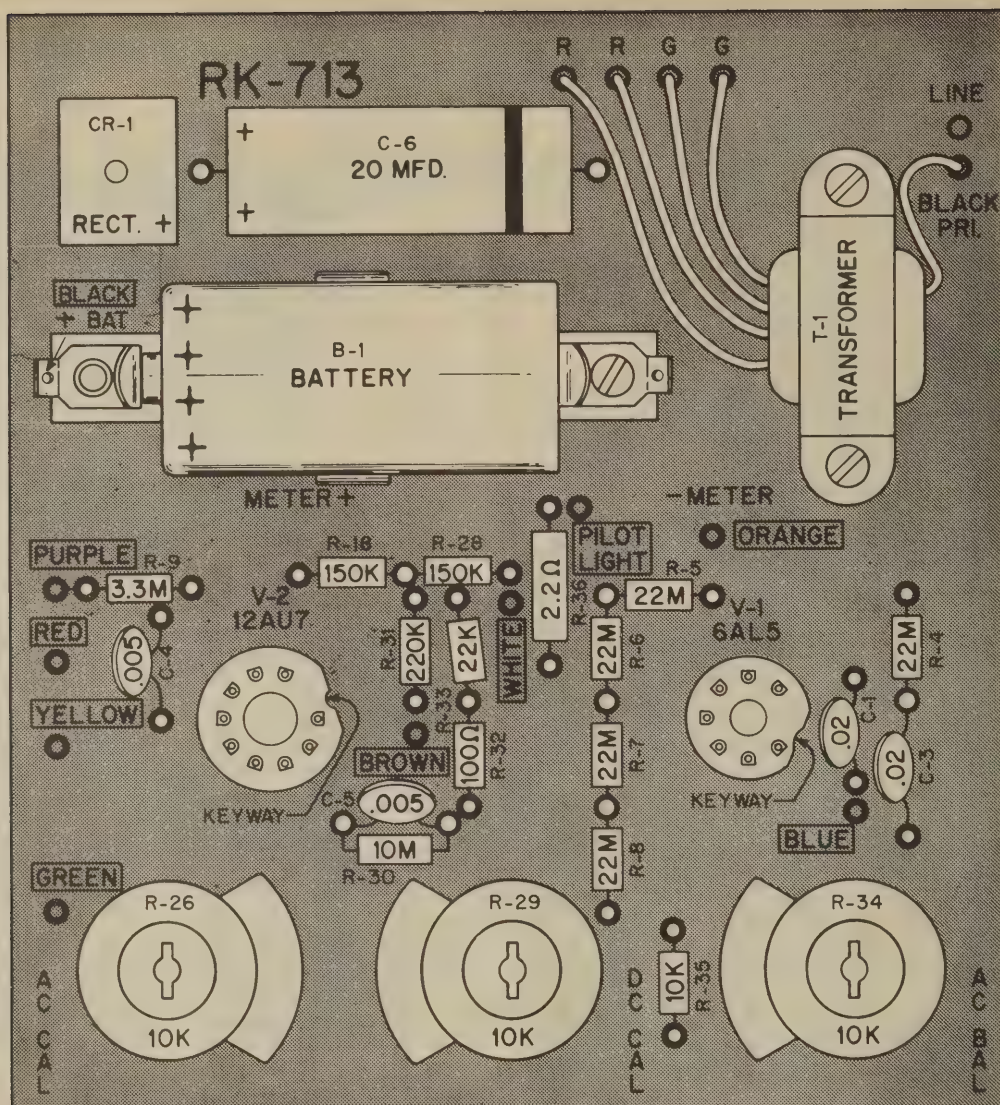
MOUNTING THE PARTS ON THE PRINTED CIRCUIT BOARD
